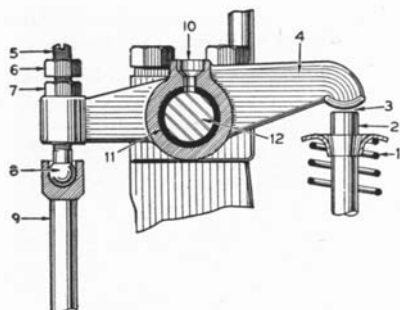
Detailed view of overhead valve and rocker-arm clearance adjustment
